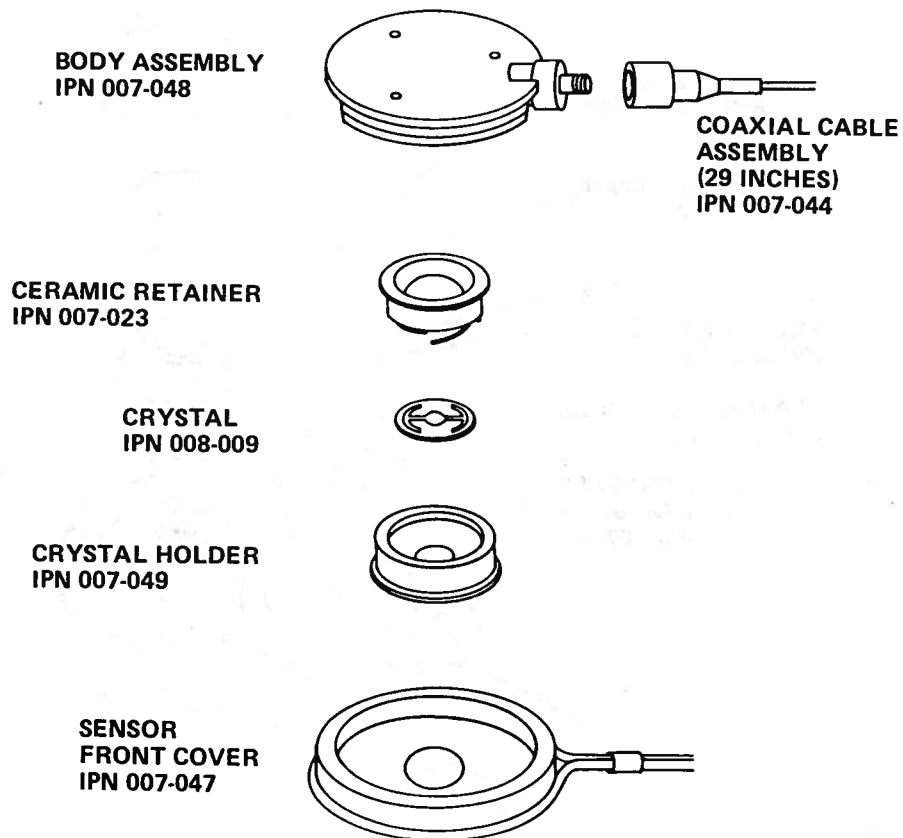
Sputtering Crystal Sensor (Exploded View)
